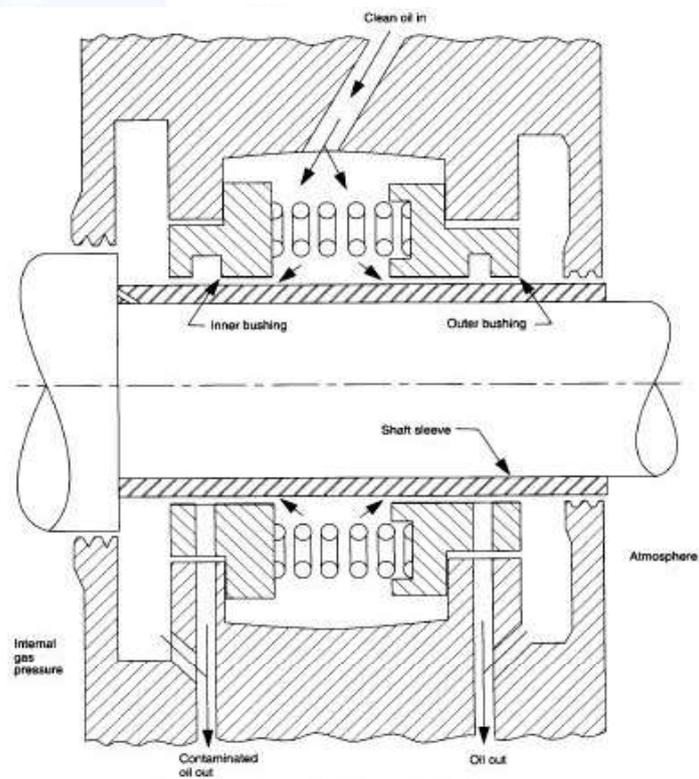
Liquid-Film Shaft Seal with Cylindrical Bushing
